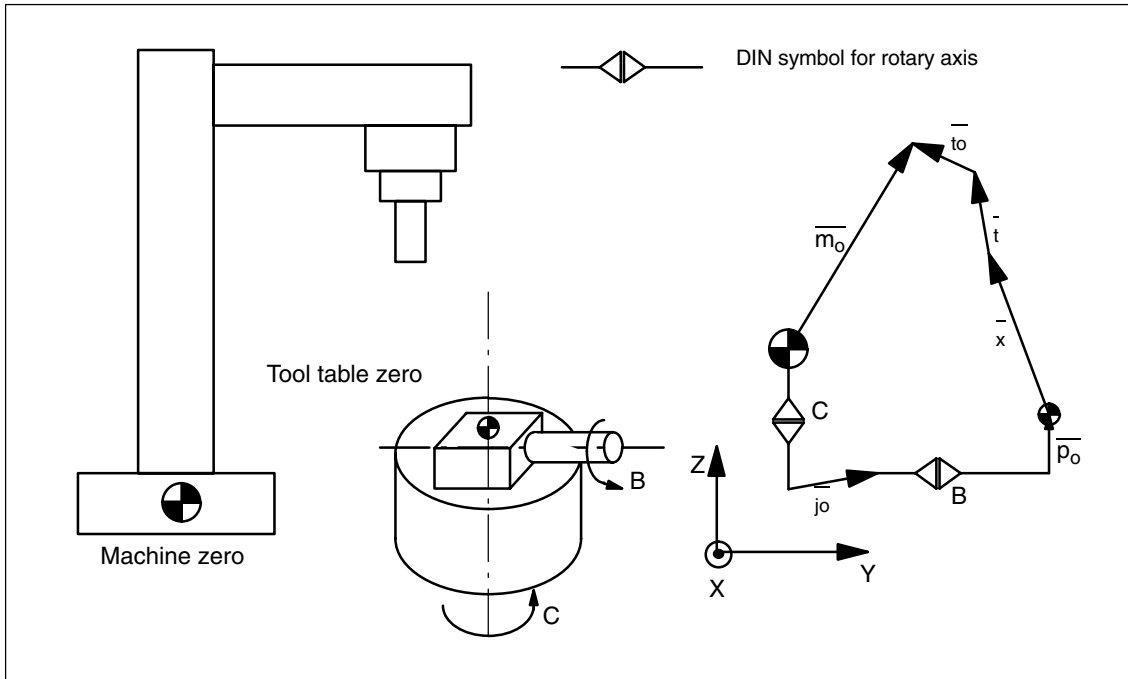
Schematic diagram of CB kinematics, moved workpiece
